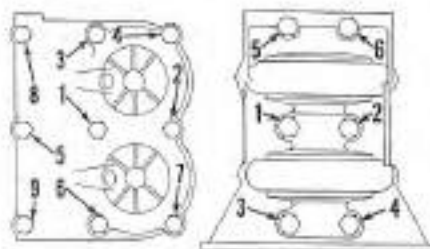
On Fishing Scott motors tighten the cylinder head screws to a torque of 100 inch pounds in the sequence shown in the left view. Tighten the crankcase screws to a torque of 100 inch pounds in the sequence shown in the right view.
